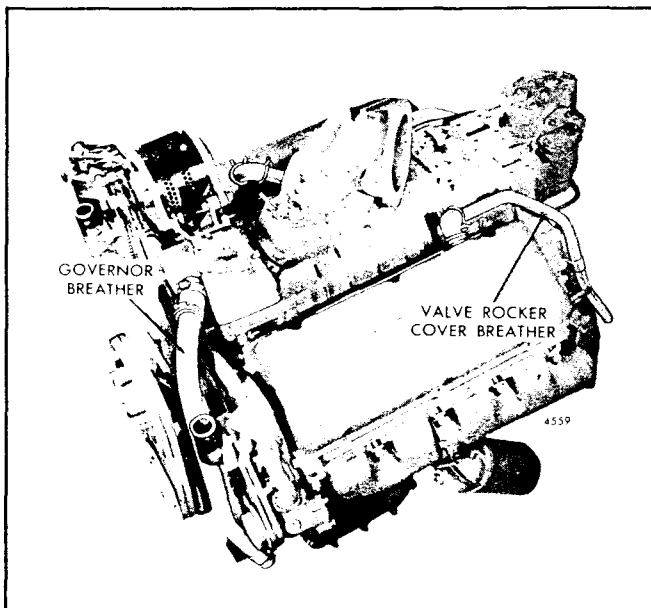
Typical Breather Mountings (8V-53 Engine)
